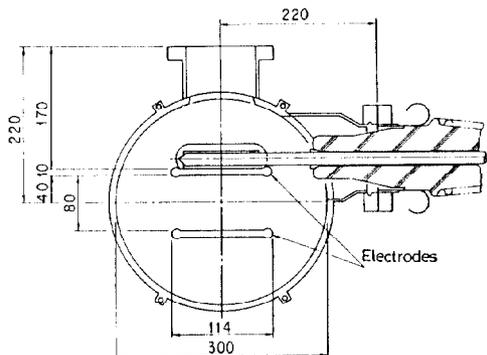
Assembly of electrodes, heat pipe type bushing and a separator chamber.
